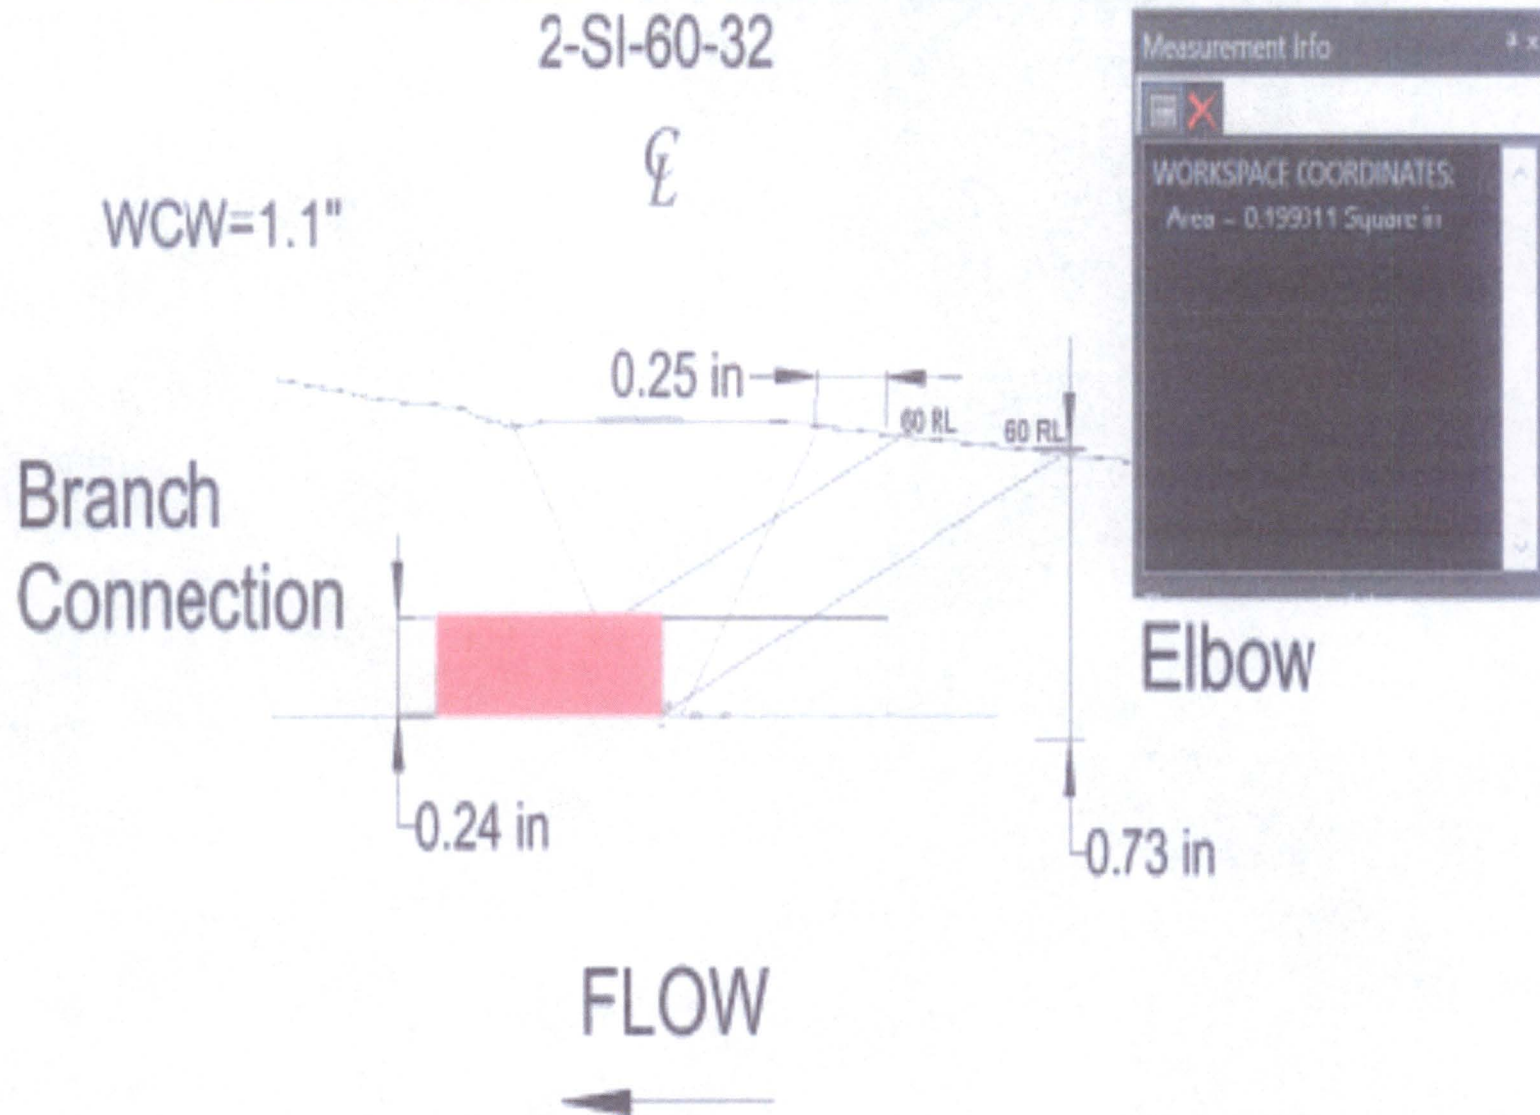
Weld 2-SI-60-32 (Extracted from Reference DRAWING 2A-52)
